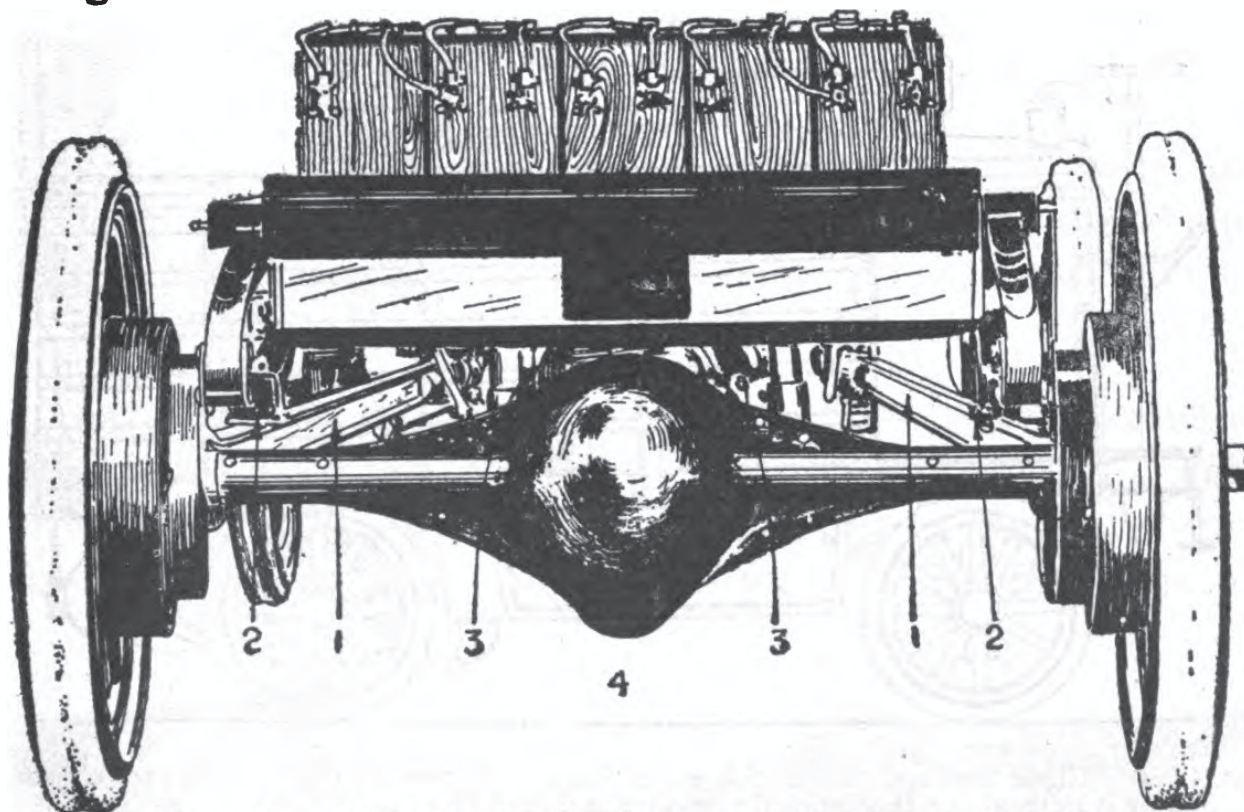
,079.—Rear view of Wood's chassis with battery showing the following *features of construction*: 1, radius rods extending from rear axle to sub-chassis frame; 2, rear springs rest on radius rods, instead of on rear axle; 3, motor, showing ball and socket spring suspension; 4, worm drive, showing location of worm below rear axle.
